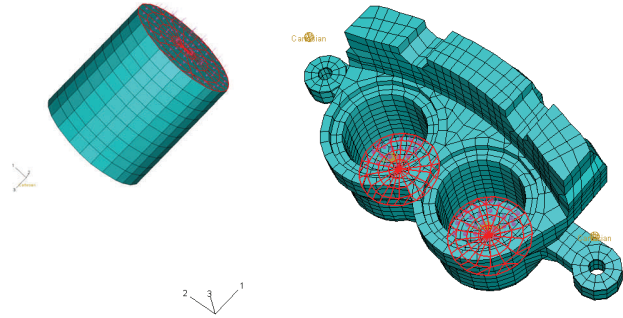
Caliper and piston, with pressure-loaded surfaces highlighted.
